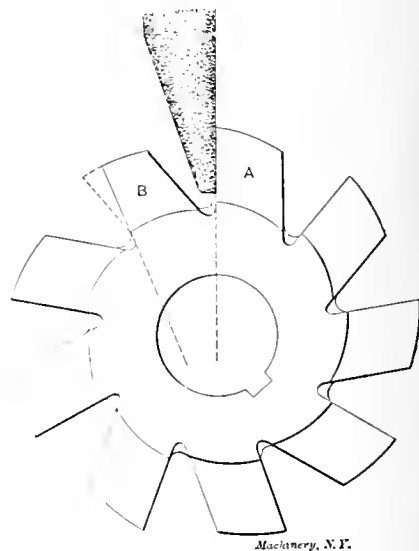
Correct and Incorrect Methods of Grinding Gear-cutter Teeth.
